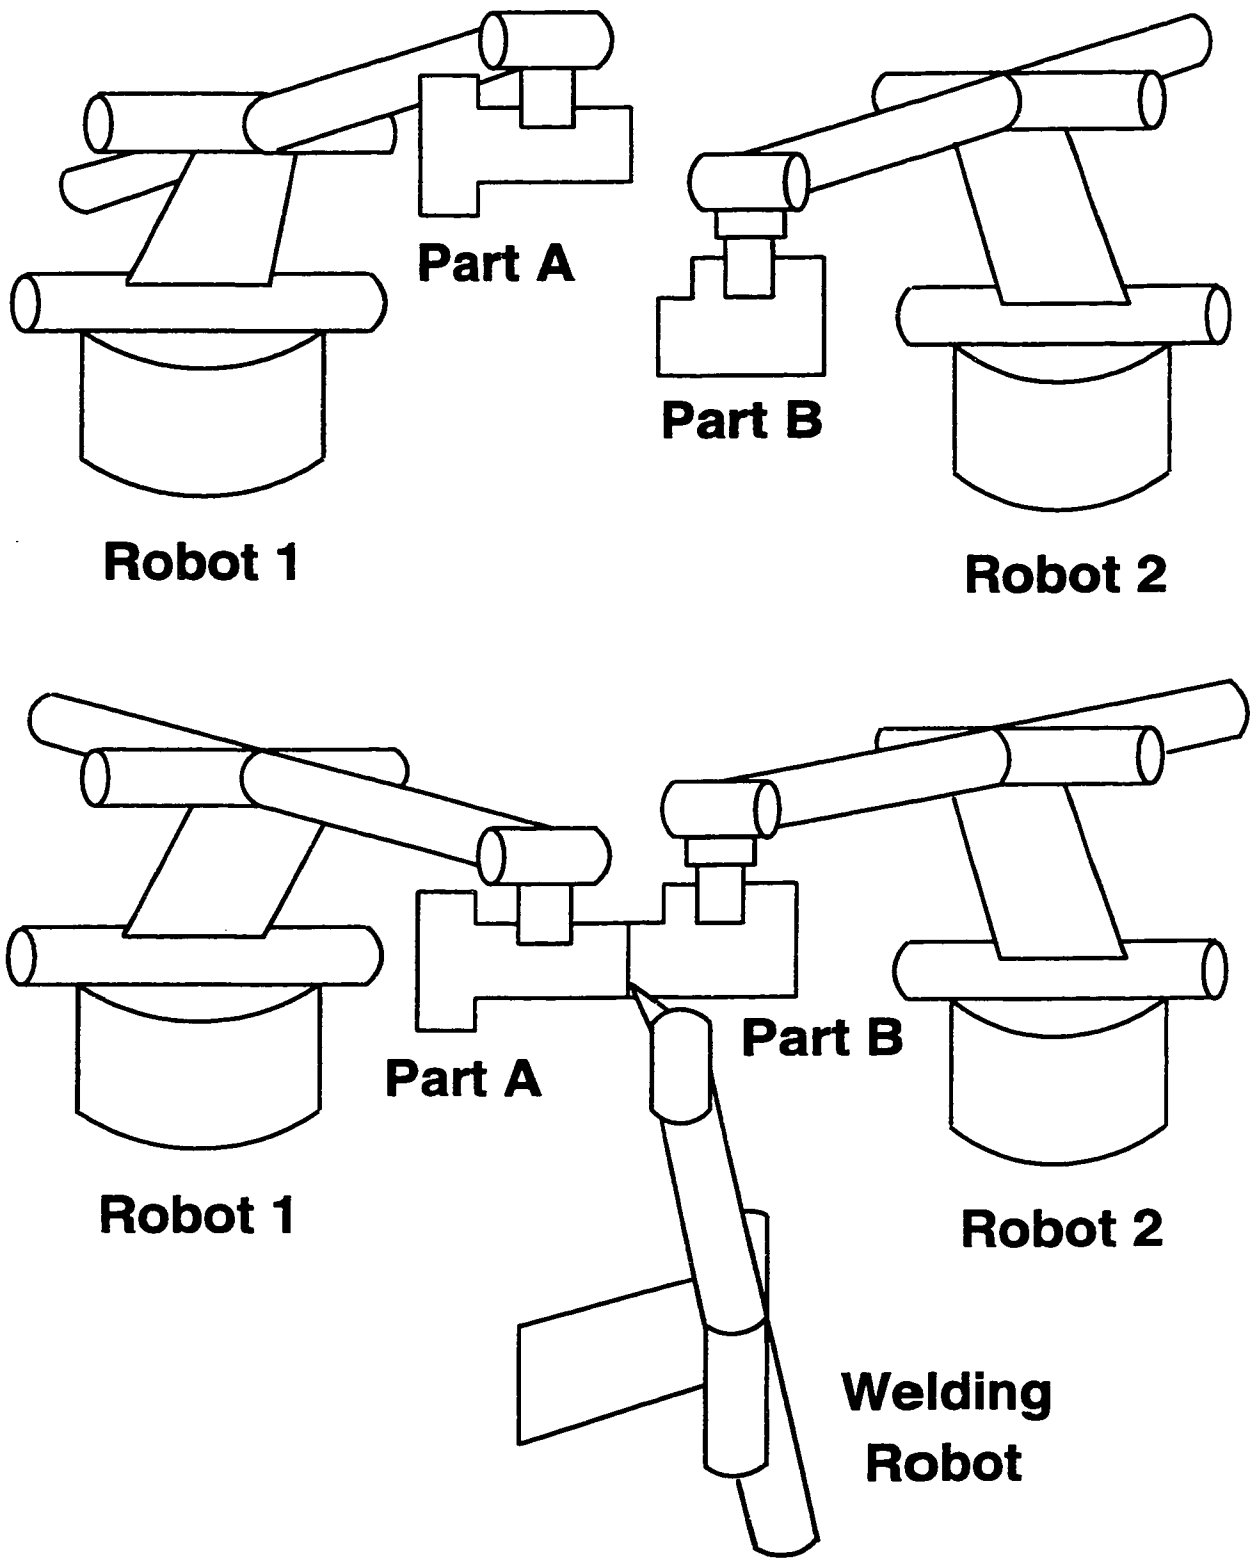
The Idea of Robotic Fixtureless Assembly
